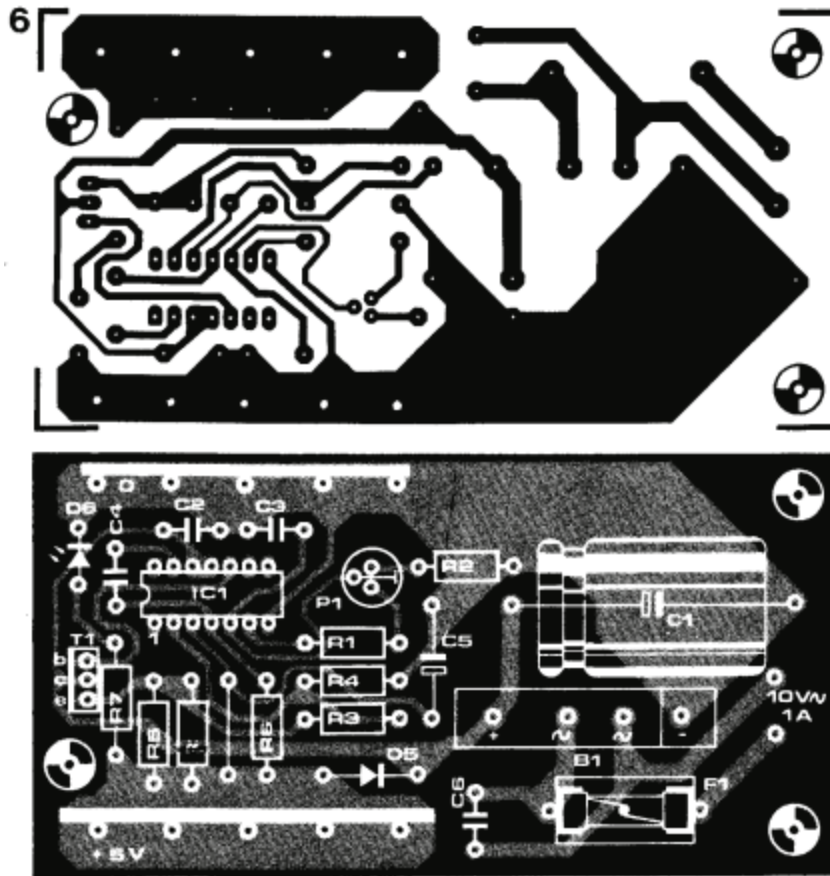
PCB layout and component placement guide for the circuit shown in [Figure 4](#). On the PCB, R5 consists of two resistors connected in parallel
